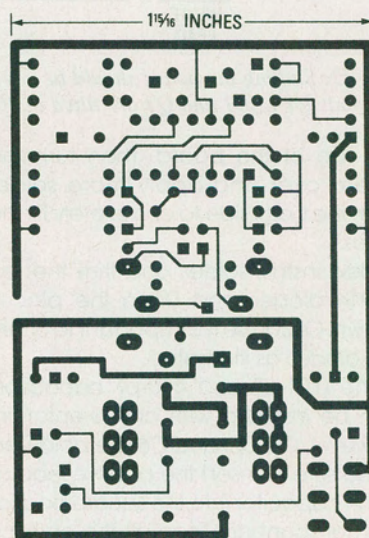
This foil pattern for the solder side of the robot must be properly registered with the component-side pattern. Remember to connect all vias when the board is finished.
